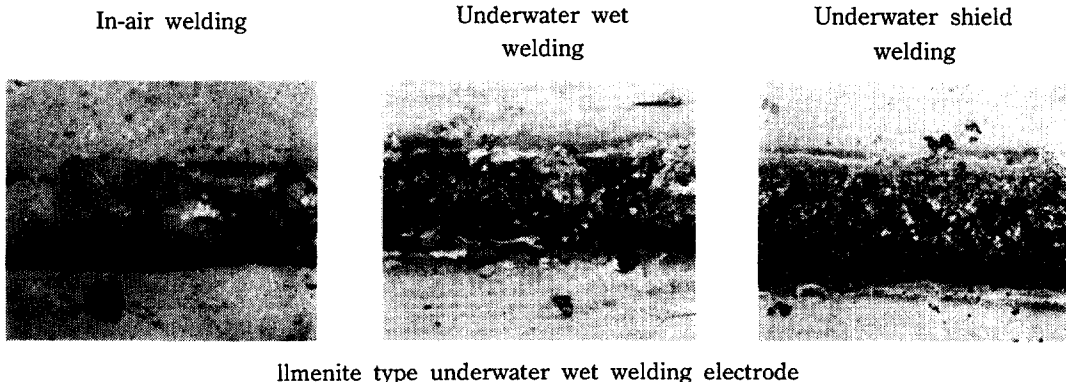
Appearance of slug in various welding environments(as shield or not)
